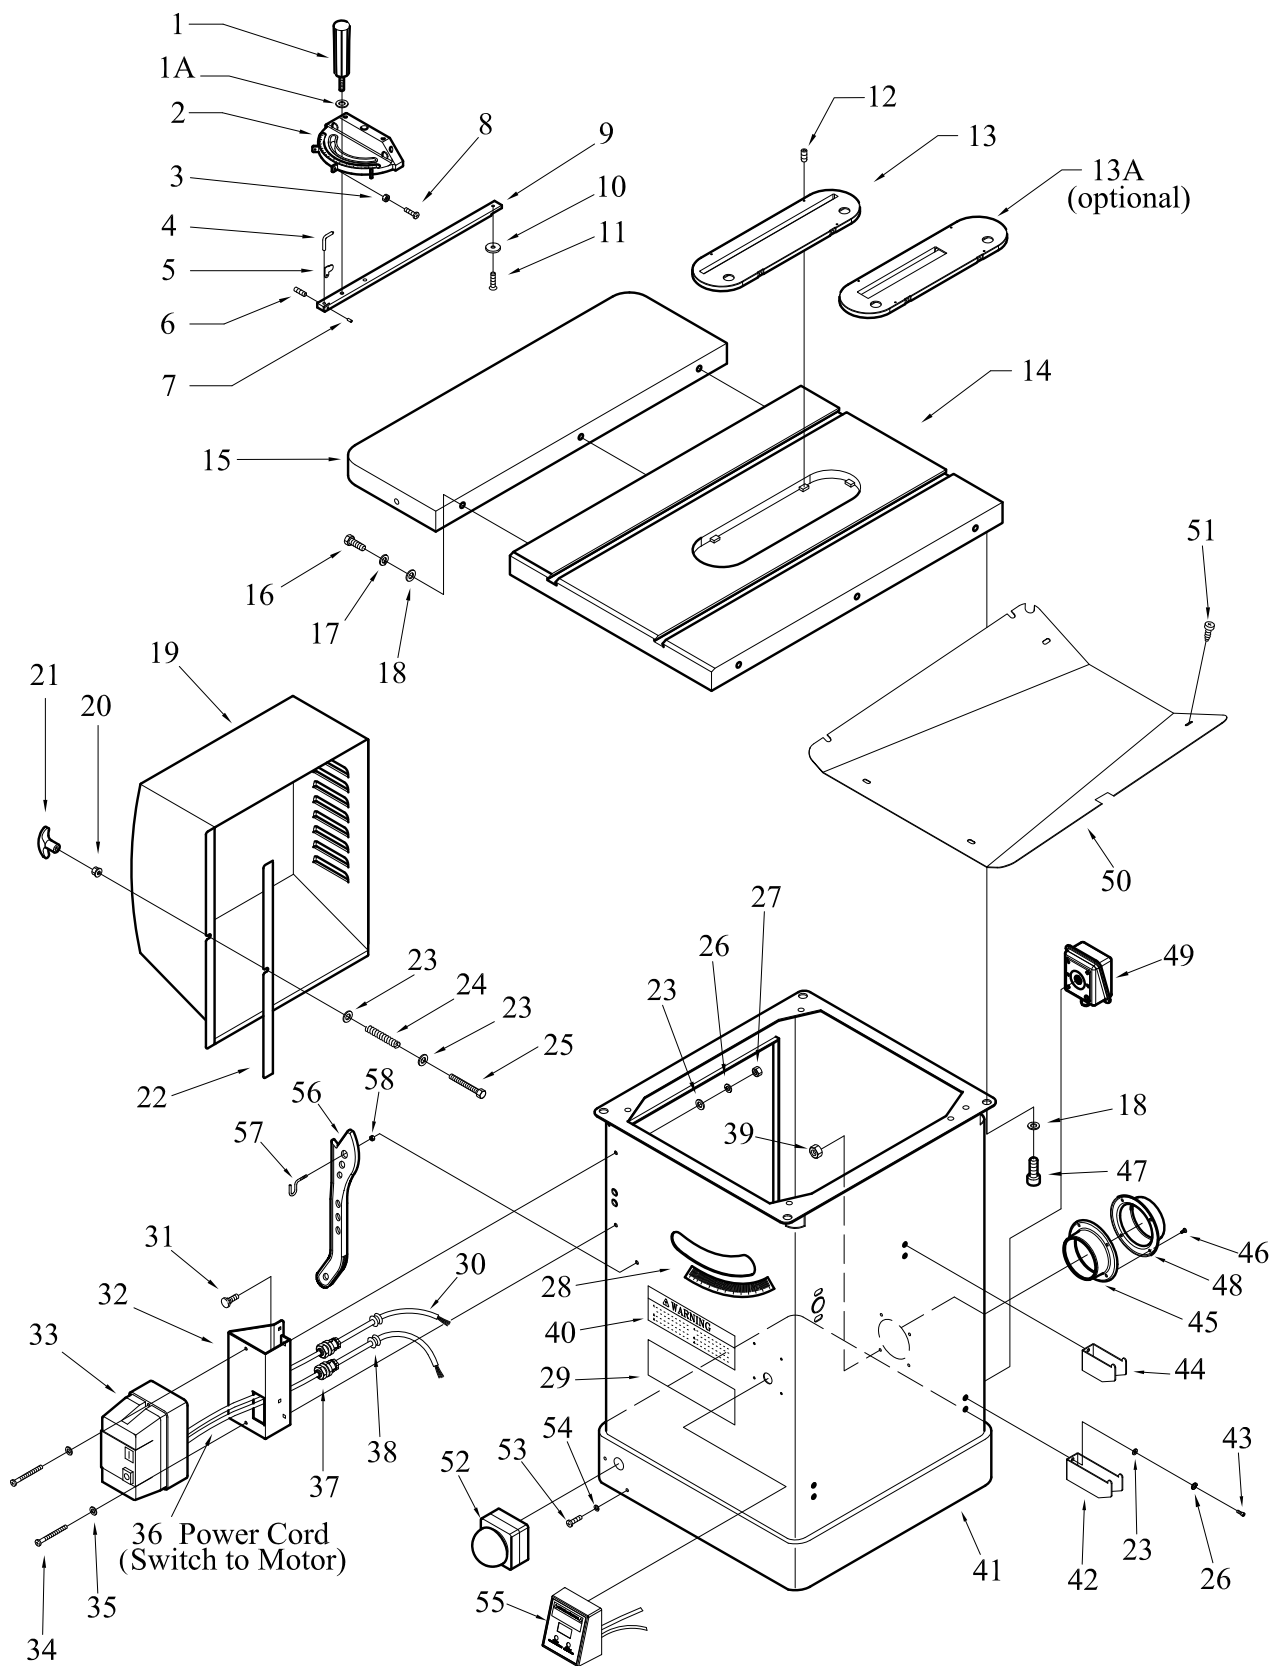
Replacement Parts Illustration for Table and Cabinet Assembly
